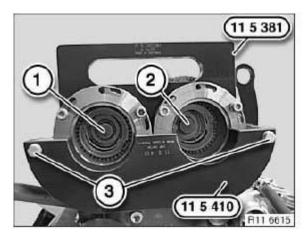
Identifying Special Tool 11 5 381 And 11 5 410 Courtesy of BMW OF NORTH AMERICA, INC.
